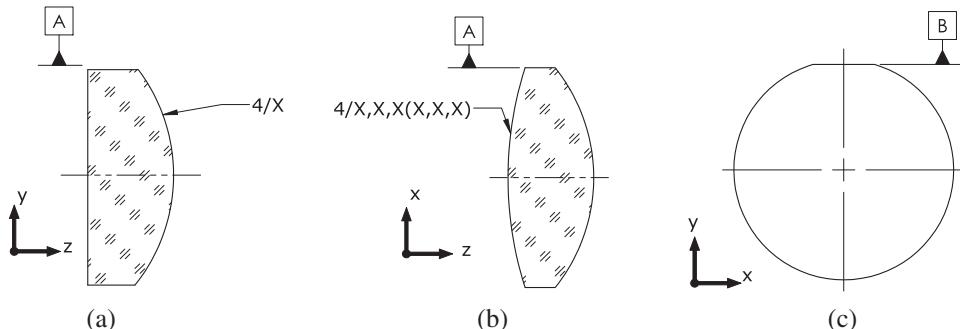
Tolerance to a freeform optical element where the left optical surface is a freeform (rotationally varying cylinder surface) and the right optical surface is a standard spherical surface. Both surfaces are referenced to the cylindrical surface (outer diameter) and the flat fiducial. Because of the complexity of this surface, only an explicit tolerance description is shown.
